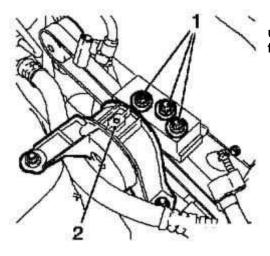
Right damping motor unit: 1 - damping block; 2 - bolts fixing
